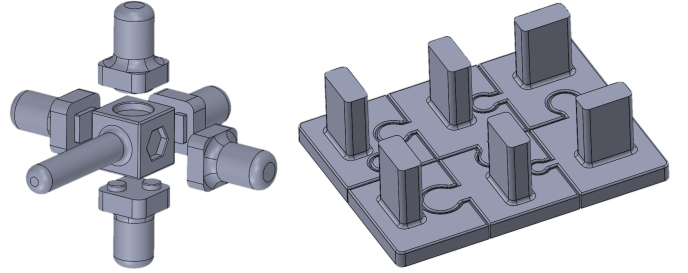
From the left: 5 pieces + core assembly and 6 pieces jigsaw puzzle parts. Each part was custom designed and 3D printed with black PLA.
